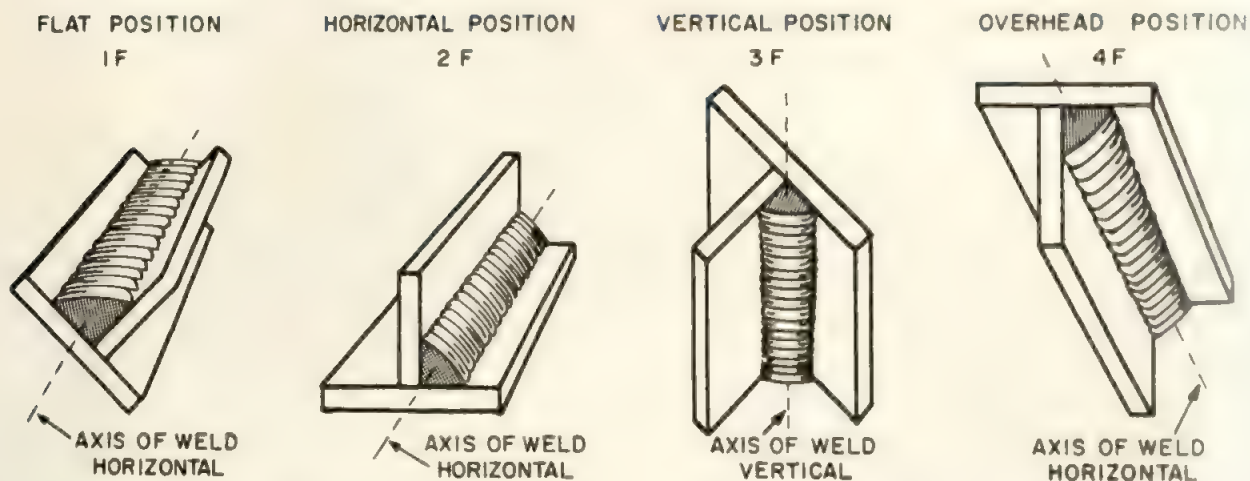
Welding positions for fillet welds: plate.
